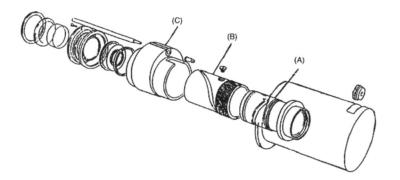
Exploded view of the zoom mechanism for the lens of Fig. 4.52. (Adapted from Ashton.³⁰)
